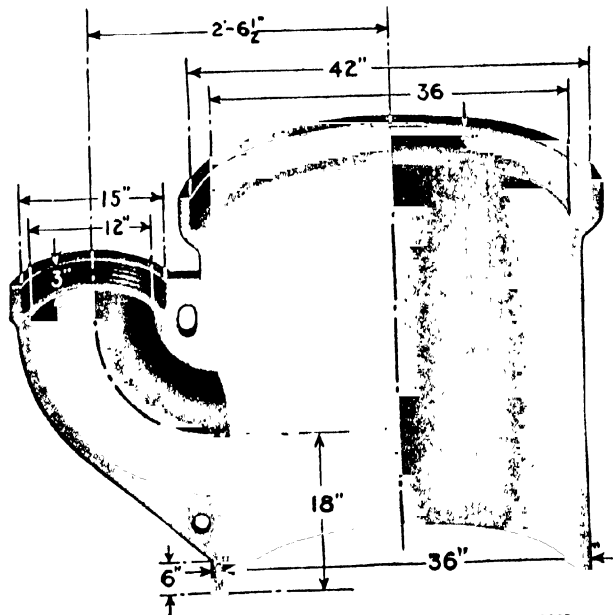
, STANDARD 36" TOWER BOTTOM SECTION
